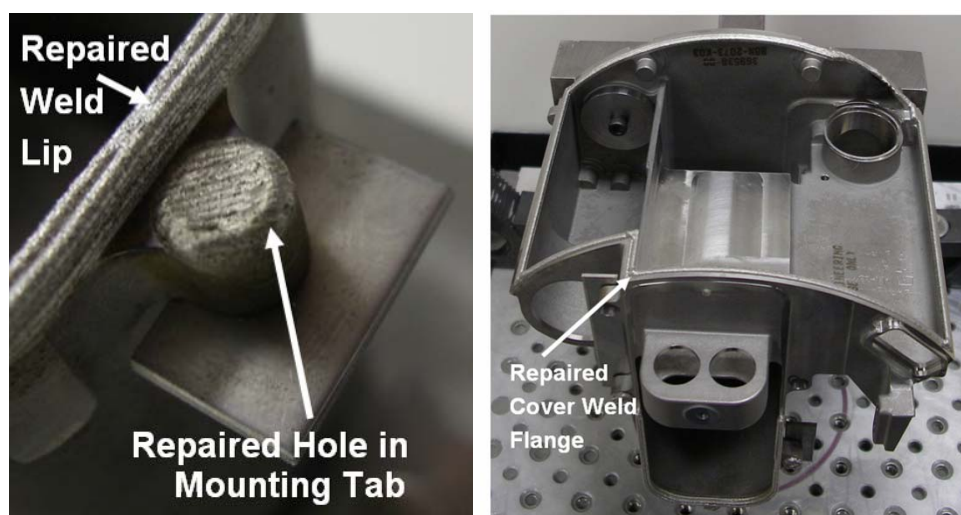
W87 Firing Set Housings Were Repaired by the LENS Process. Repaired Features Include the Can Weld Lip and Mounting Holes (left) and the Cover Weld Flange (right)
